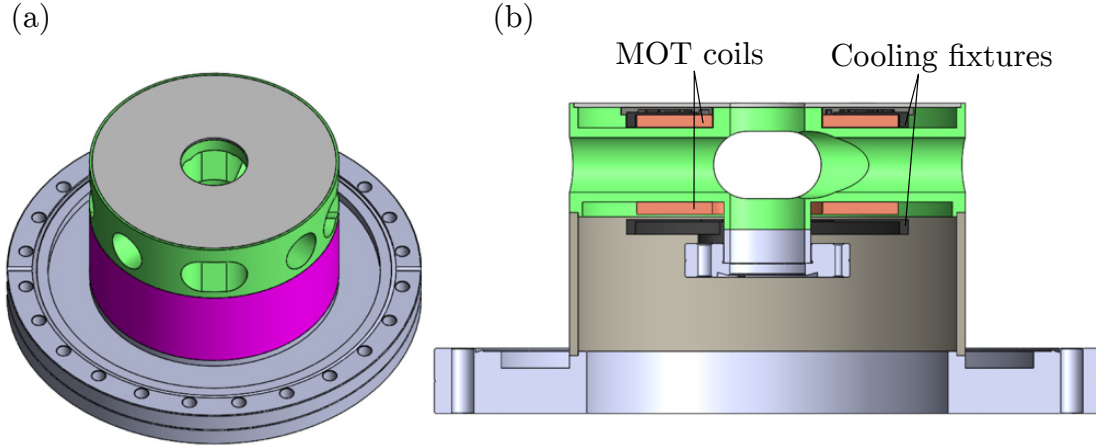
(a) Angle-view of the MOT bucket. The smaller MOT bucket pieces are welded together on a 10 inch conflat flange that is bolted to the bottom of the chamber. (b) Side cut-view of the MOT bucket. The MOT coils and the cooling fixtures inside the MOT bucket are labelled. In total, there are 5 in-vacuum welds.
